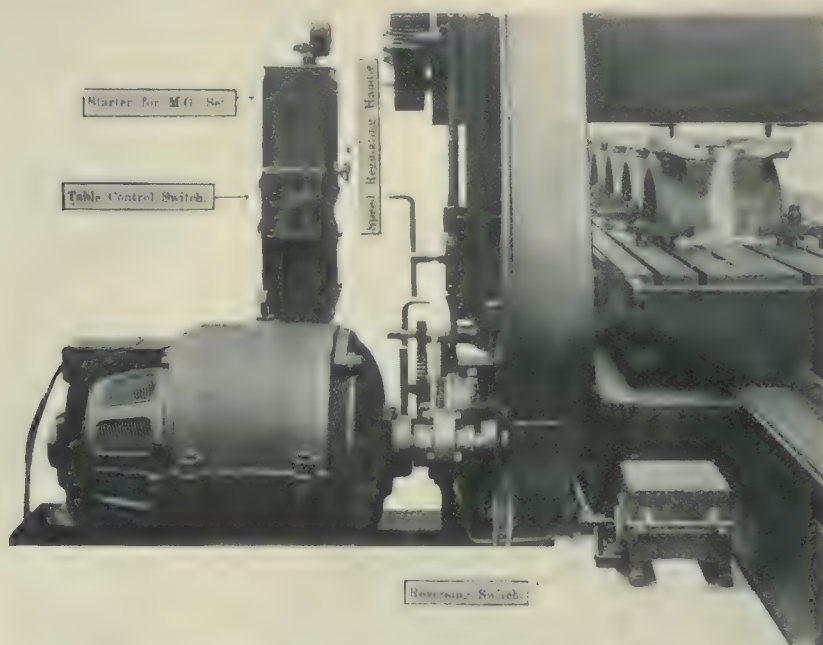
The "Lancashire" Drive, showing Table Control.
